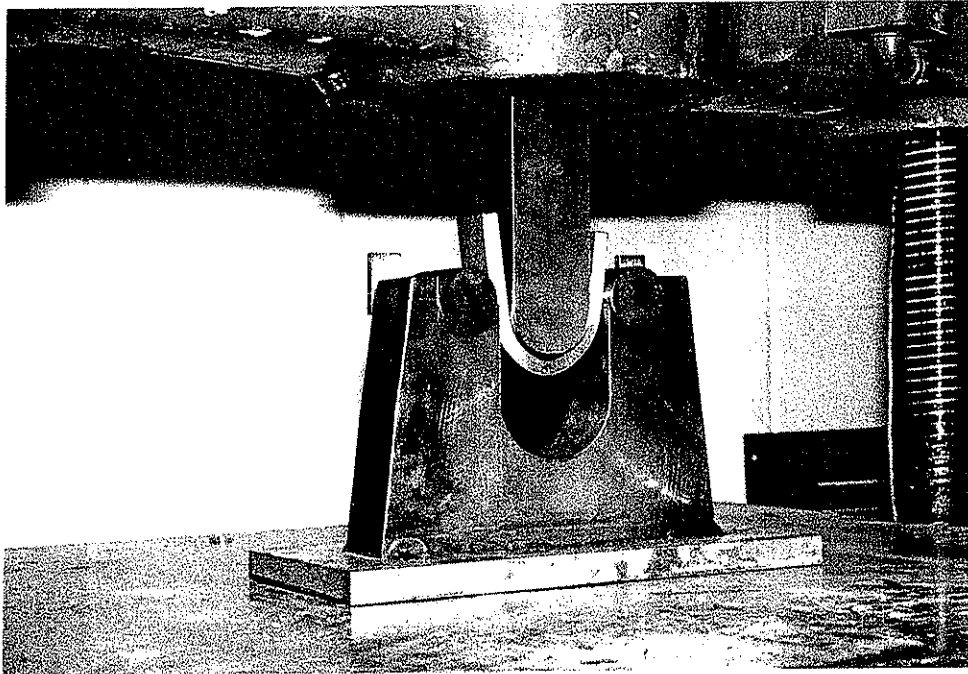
Side Bend Test Setup[photo: 5/92/26-8]
